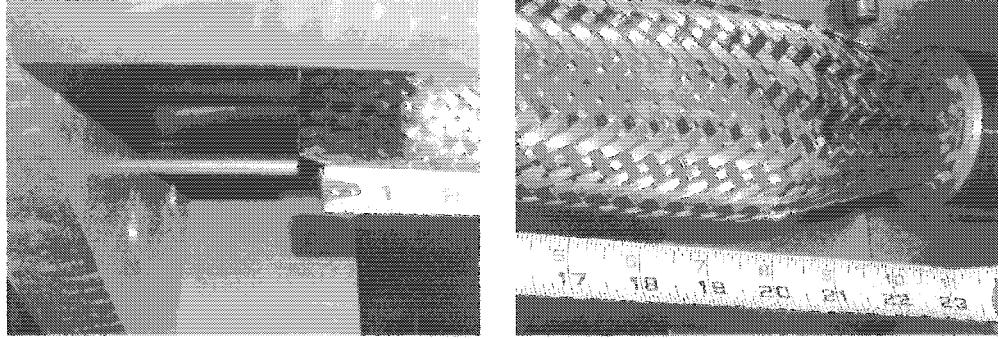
Effective length of braided tube between mounting points (dimensions in inches)
